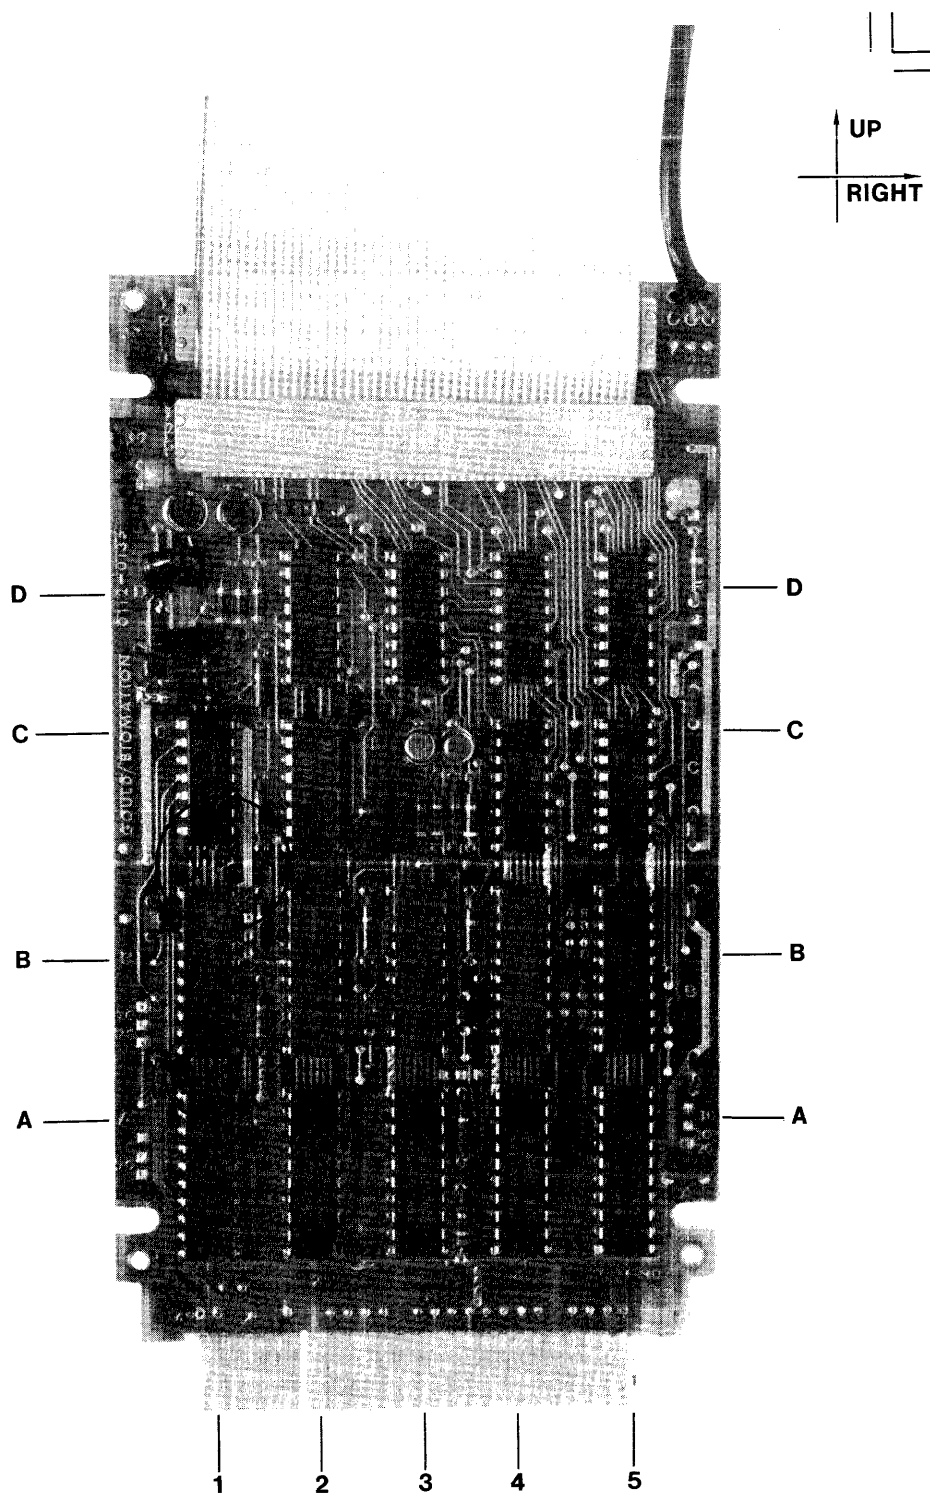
View of Component Side of K100-D/32 Channel Adapter Board Showing the Six Cuts Needed for Version 40 (Z-80) Operation
